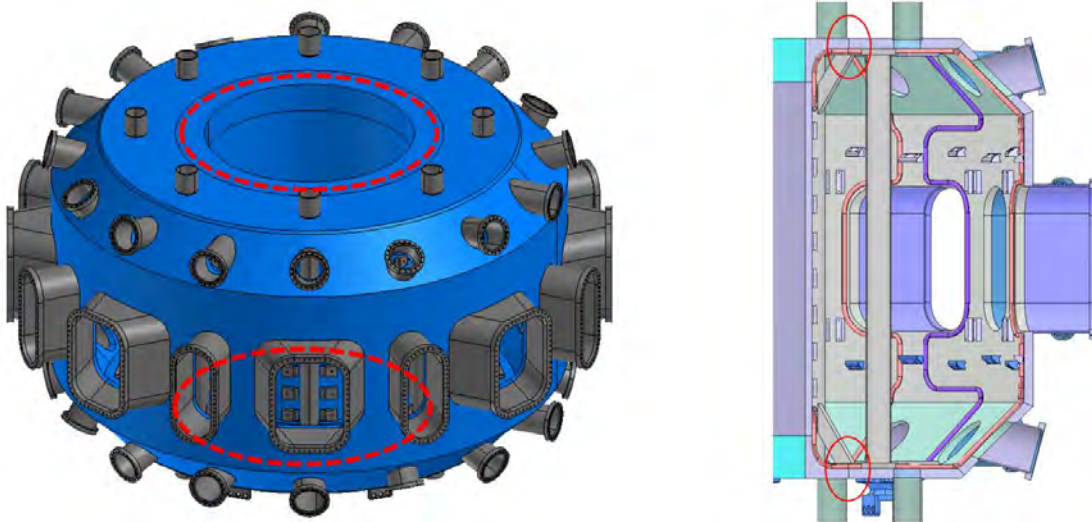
Position of EB welds to finalize the VV assembly
